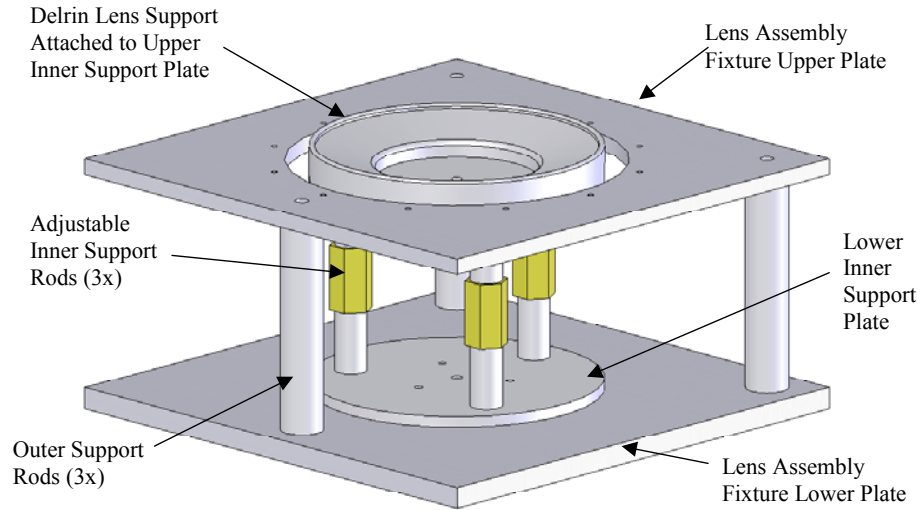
Prototype Lens Assembly Fixture Configured for Field Lens Assembly
